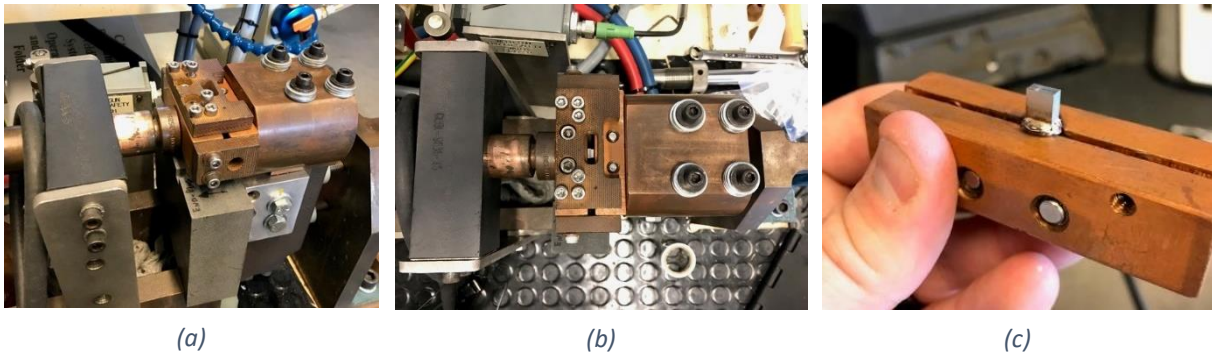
PRW setup for welding coupons; (a) PRW set up (b) coupon alignment check (c) post weld of coupon left in copper electrode.
